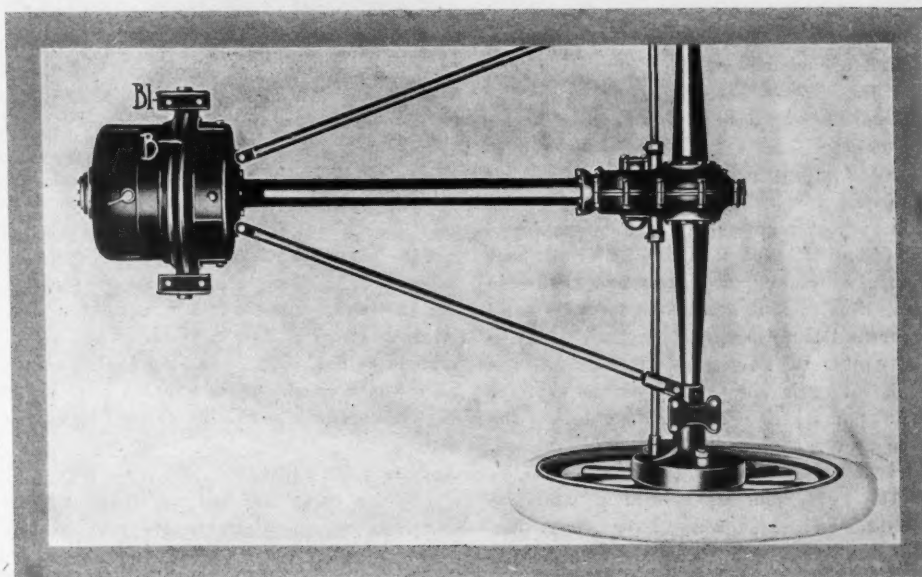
MOTOR AND REAR AXLE UNIT IN STANDARD ELECTRIC
